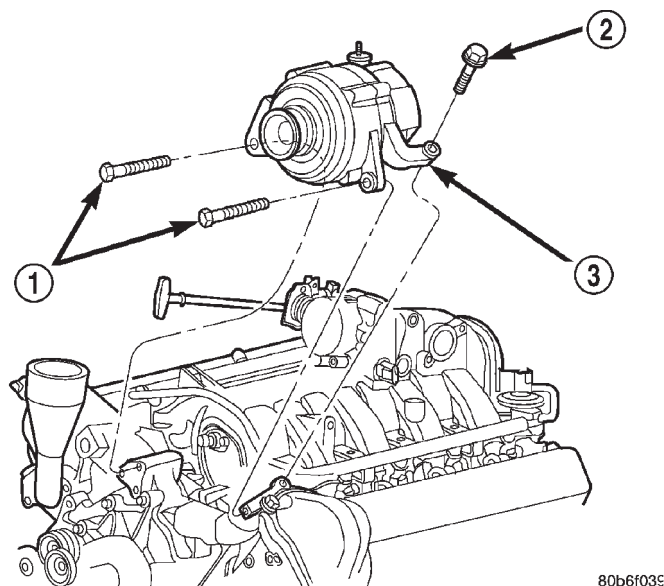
Remove/Install Generator—4.7L V-8 Engine
